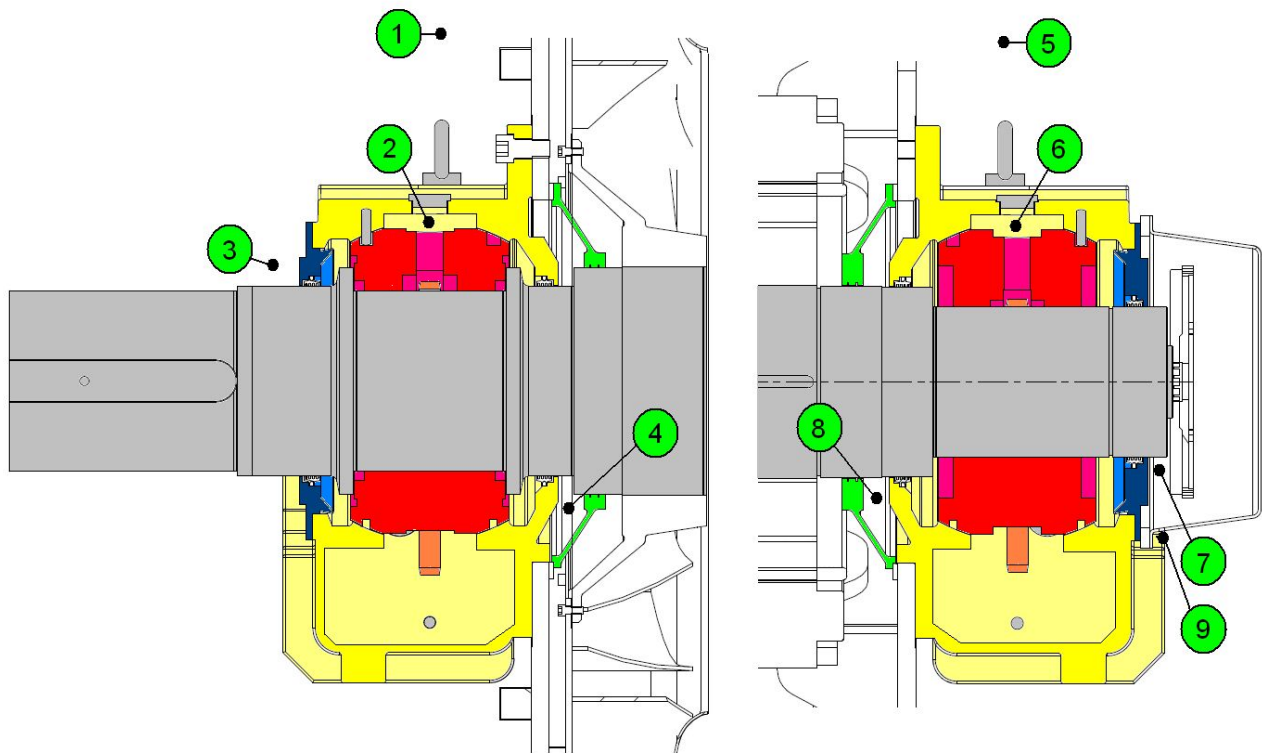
CHECKING THE AIR PRESSURE INSIDE AND OUTSIDE THE SLEEVE BEARING (1 - SLEEVE BEARING COVER)
